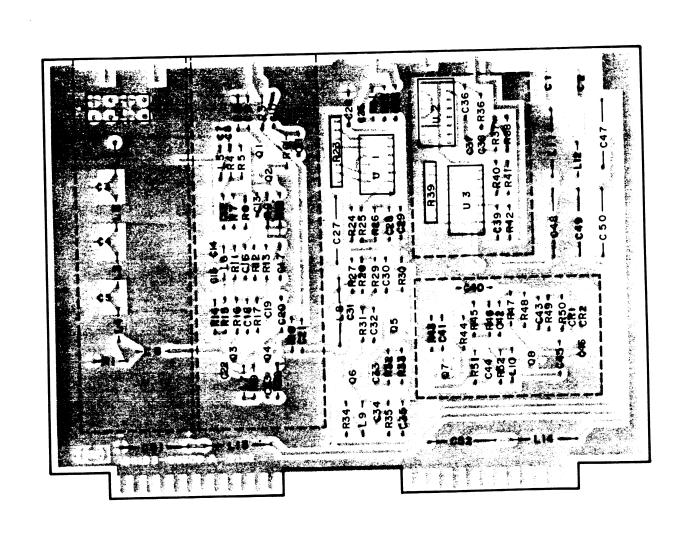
A9 Mixer Board Assembly Component Locations.
